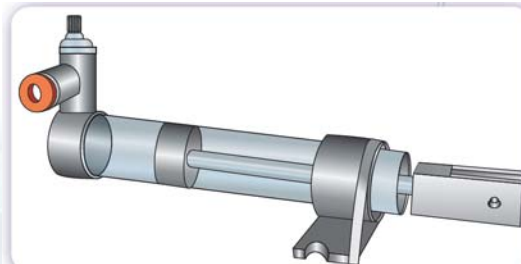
A CAD drawing of a single-acting cylinder showing the piston inside.
